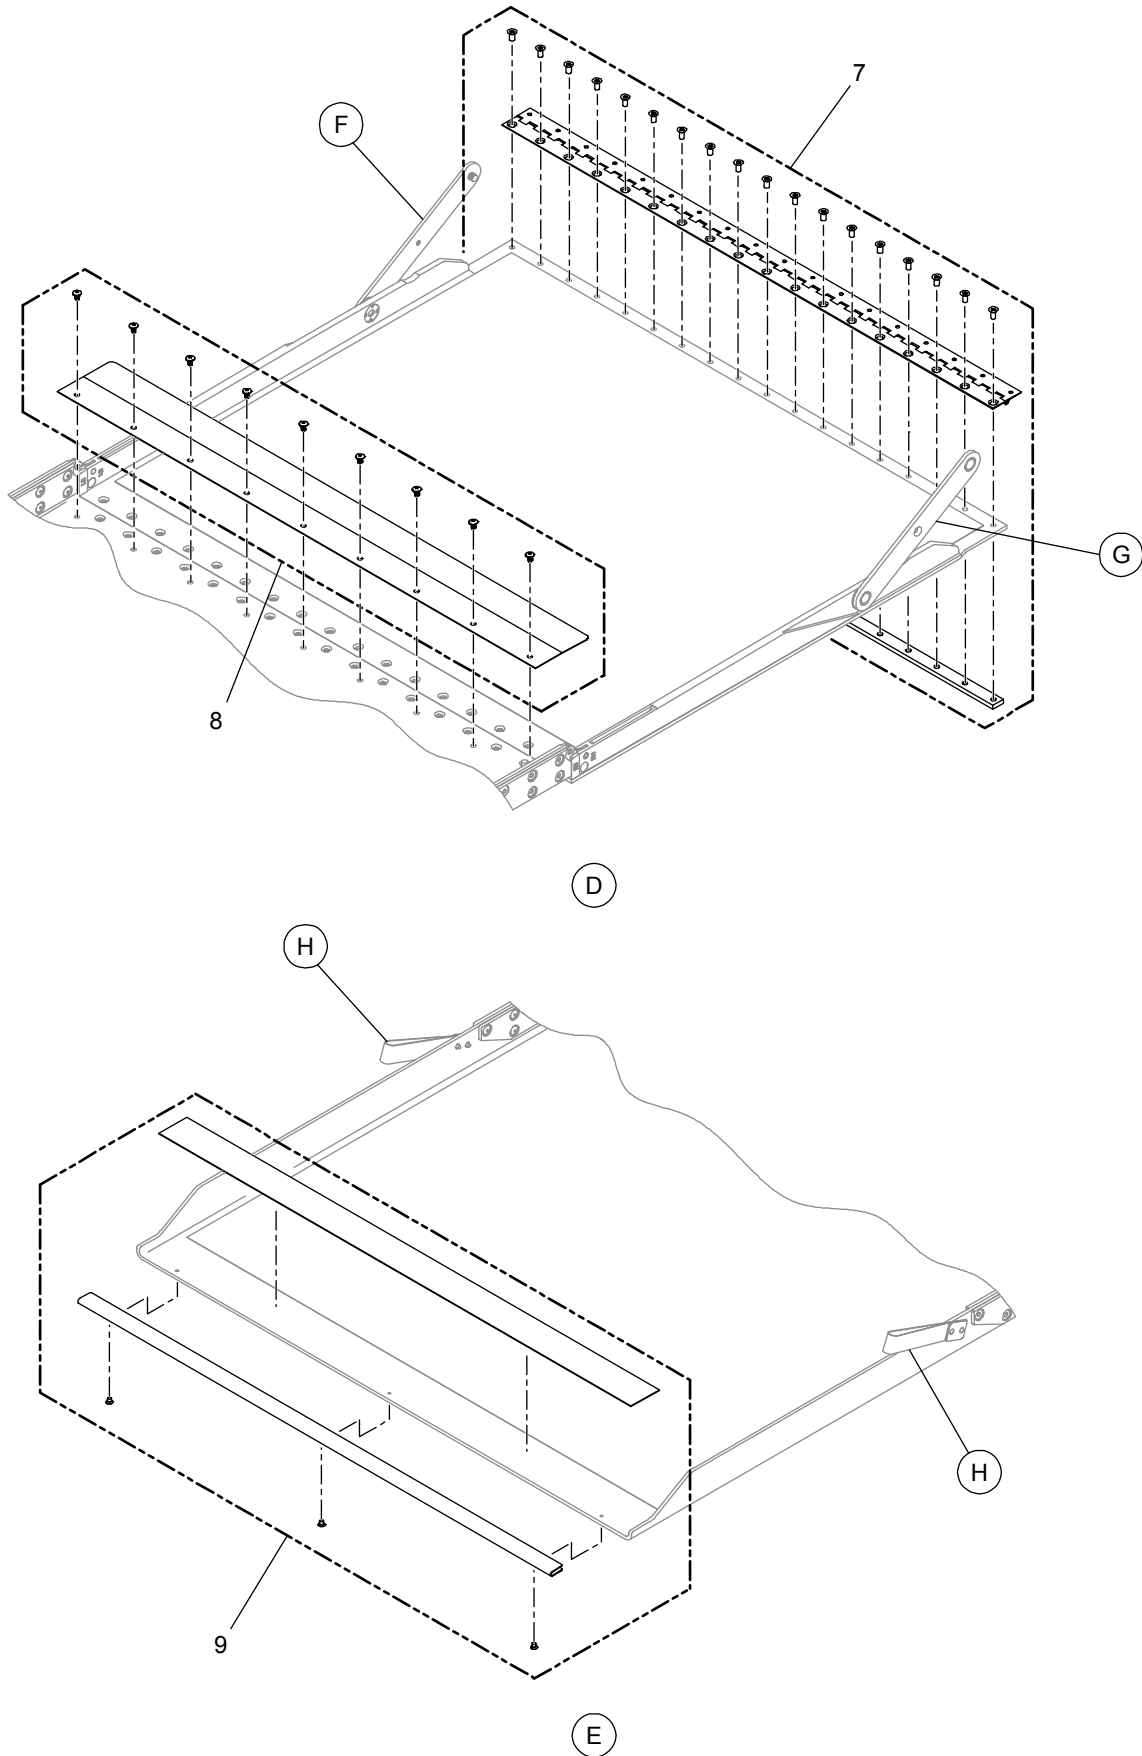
ELECTRIC BIFOLD BR2E RAMP ASSEMBLY (SHEET 3 OF 6)
